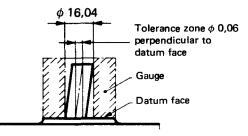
d) – Material of the minimum diameter (15,98) shown in gauge – Effective perpendicularity tolerance : ϕ 0,06
